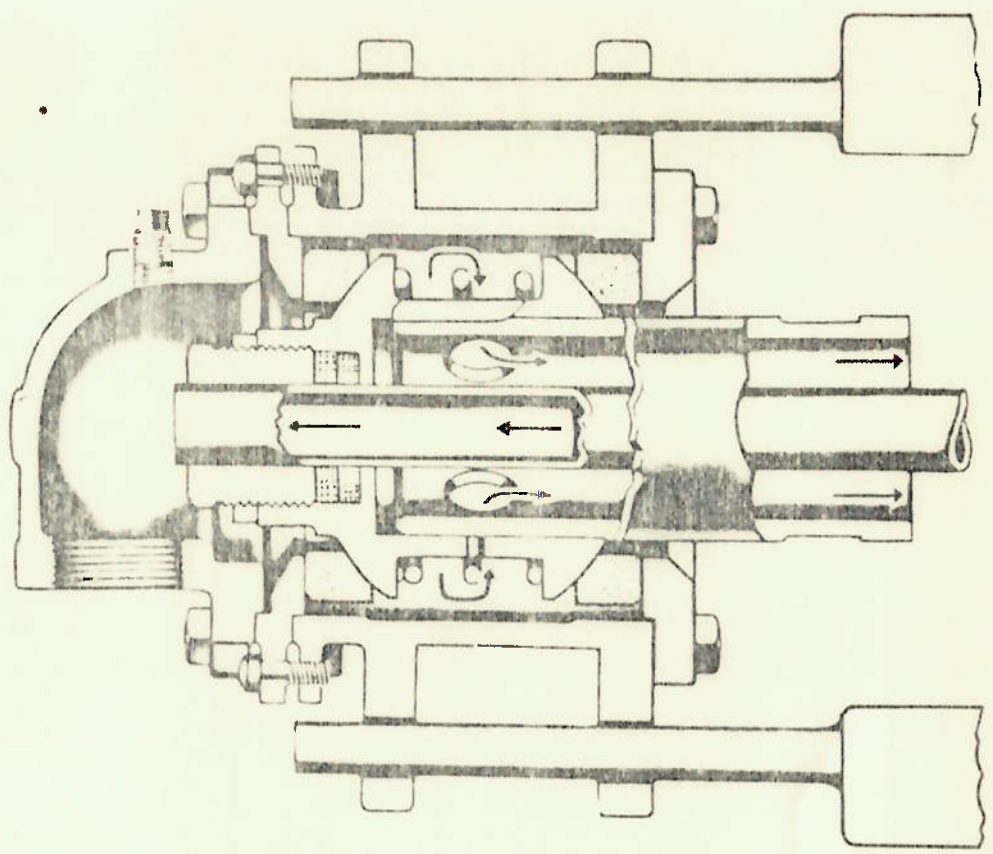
Johnson Joints on new Beloit paper machine. Support rods fit into bosses provided on bearing housing by machinery manufacturer.
